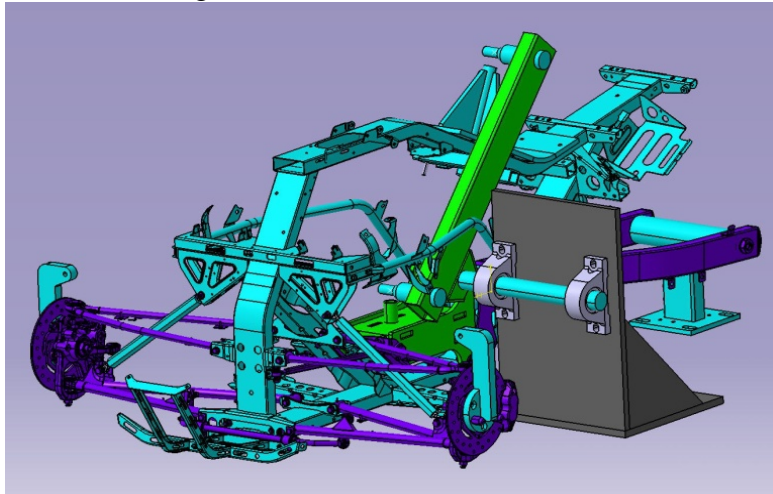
The mounting jig and frame on the testing machine (DMU)
